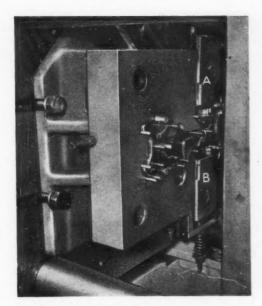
View of the Moving Die Set-up on the Reed-Prentice 1½G Machine for Making the Die Cast Frames of the Meter Seen in Fig. 3
